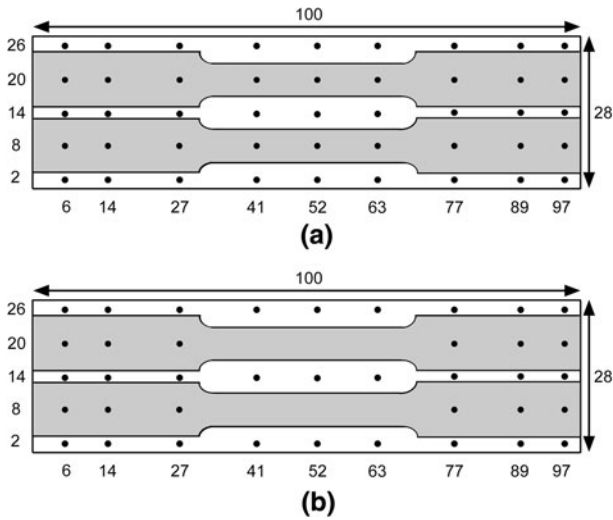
Arrangements of the dimples used in the production of tensile specimens of as-cast specimens: (a) dimpled specimens and (b) nondimpled specimens. The tensile samples were machined after infiltration and solidification.
